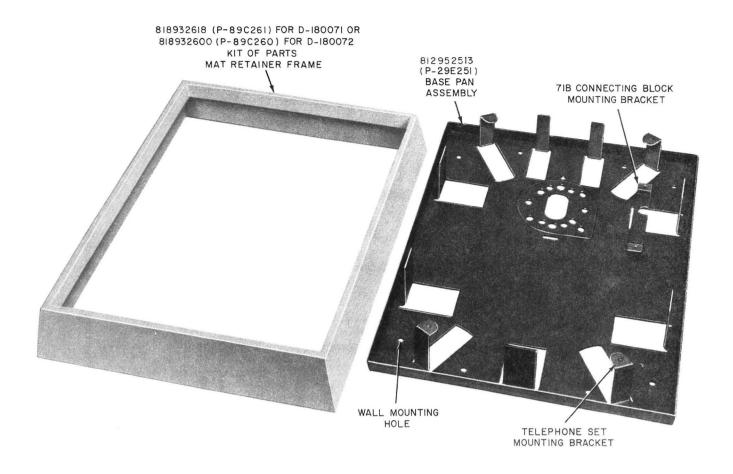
D-180071 or D-180072 Kit of Parts for Surface Mounting
